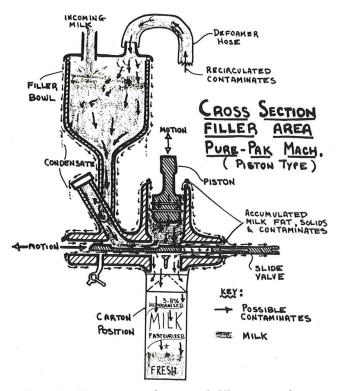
Cross section diagram of filling area of piston type Pure-Pak filling machine showing routes that contaminants gain entrance to product.
